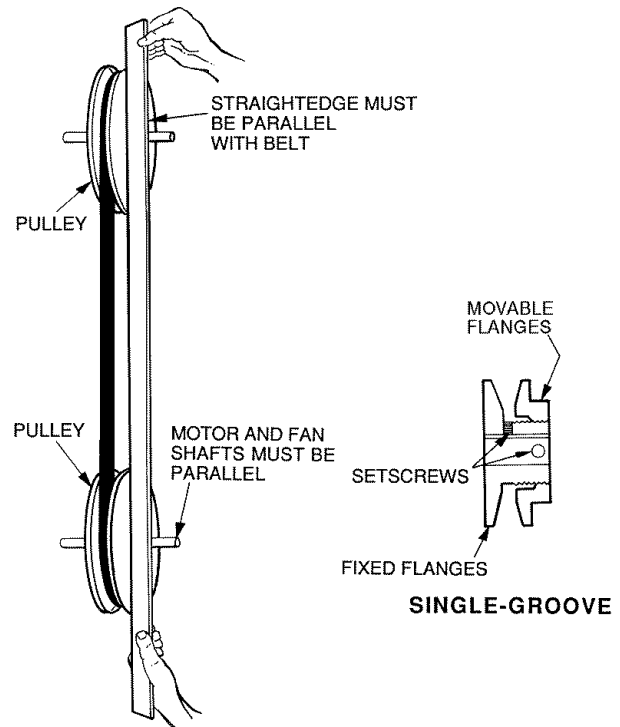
Evaporator-Fan Alignment and Adjustment
